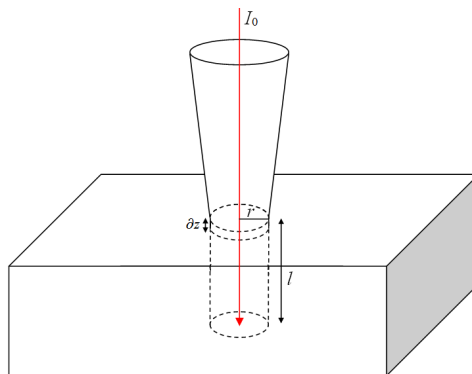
Illustration of the penetration depth of the focused laser beam on a welding specimen.
